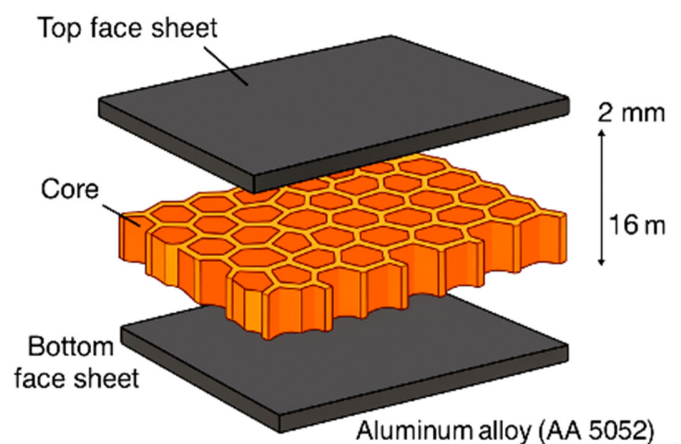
Schematic representation of the honeycomb sandwich structure showing the face sheets and core geometry
